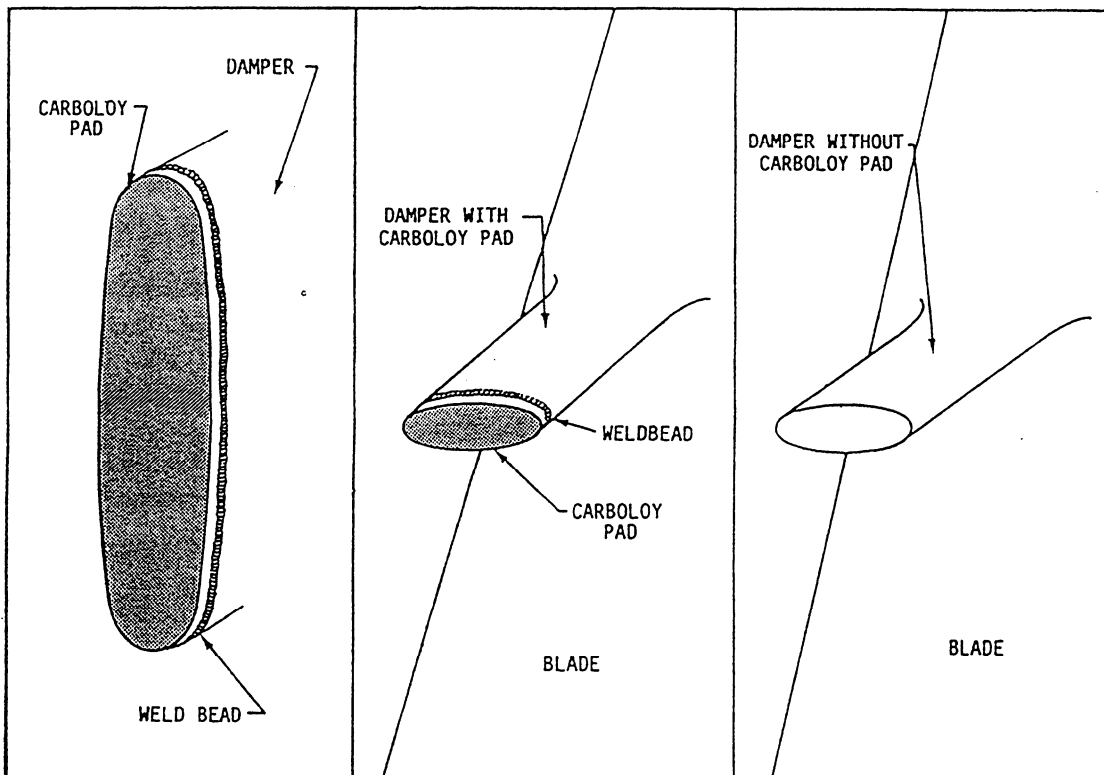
Compressor blade midspan damper carboLOY pad.
